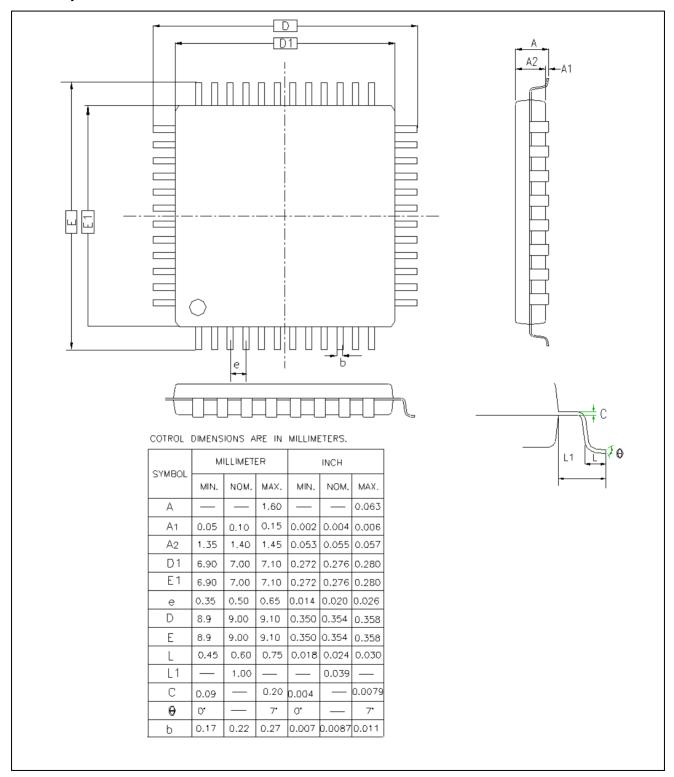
LQFP-48 (7x7x1.4mm footprint 2.0mm) Package Dimension
